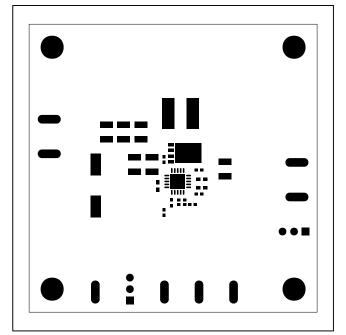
MAX17506 3.3V Output EV Kit Component Placement Guide—Solder Mask
